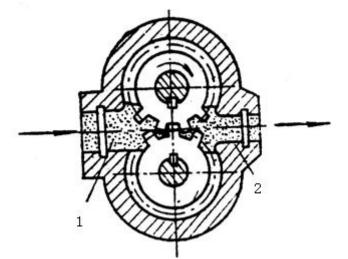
Working principle of gear pump (1) Oil suction cavity (2) Oil pressing cavity
